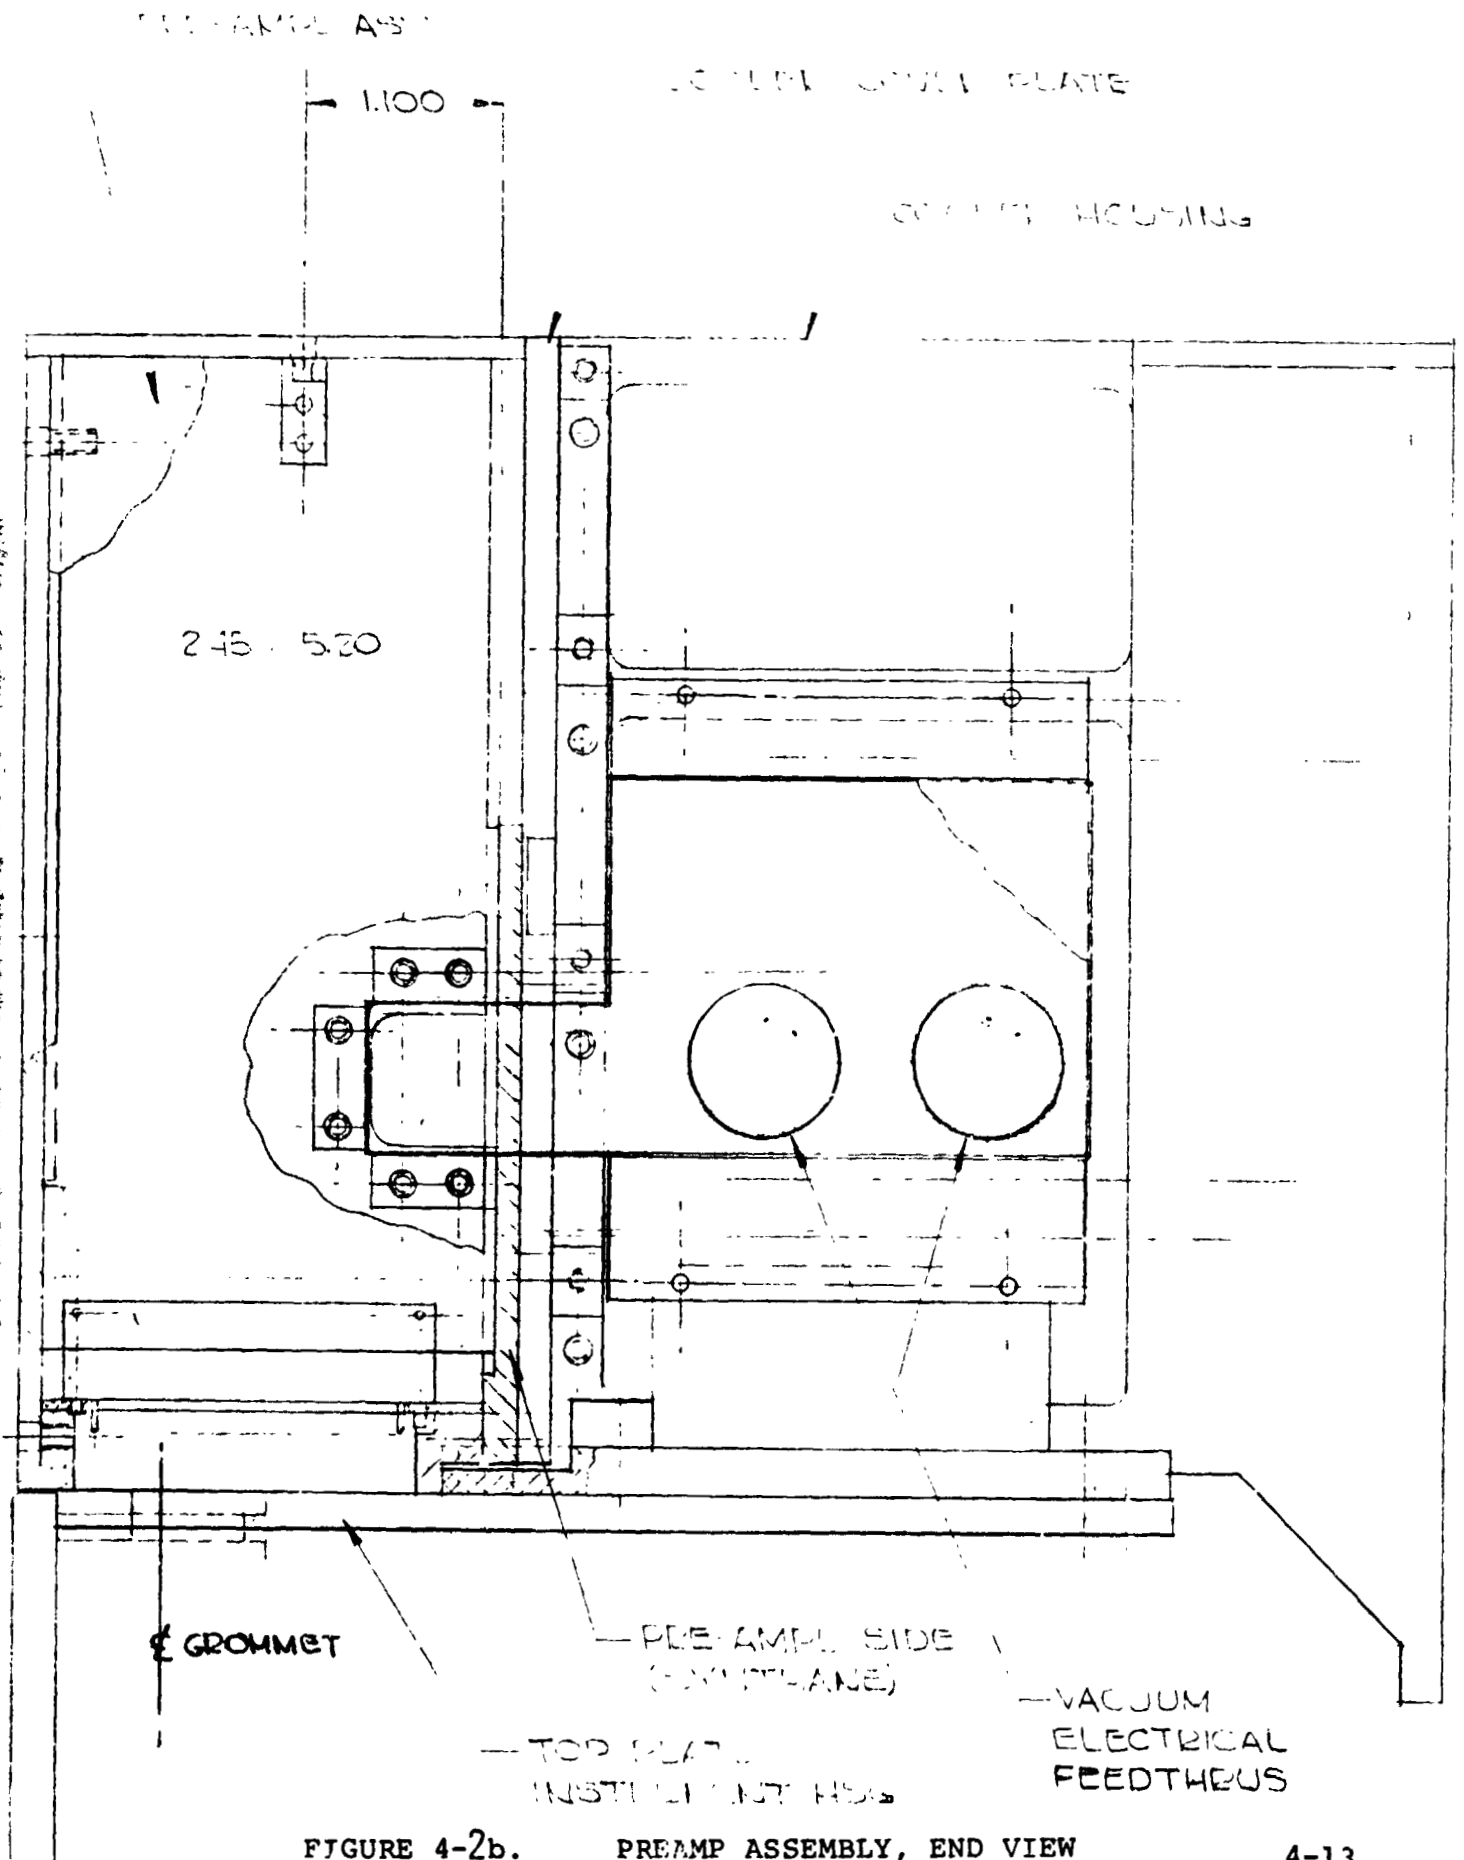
PREAMP ASSEMBLY, END VIEW
